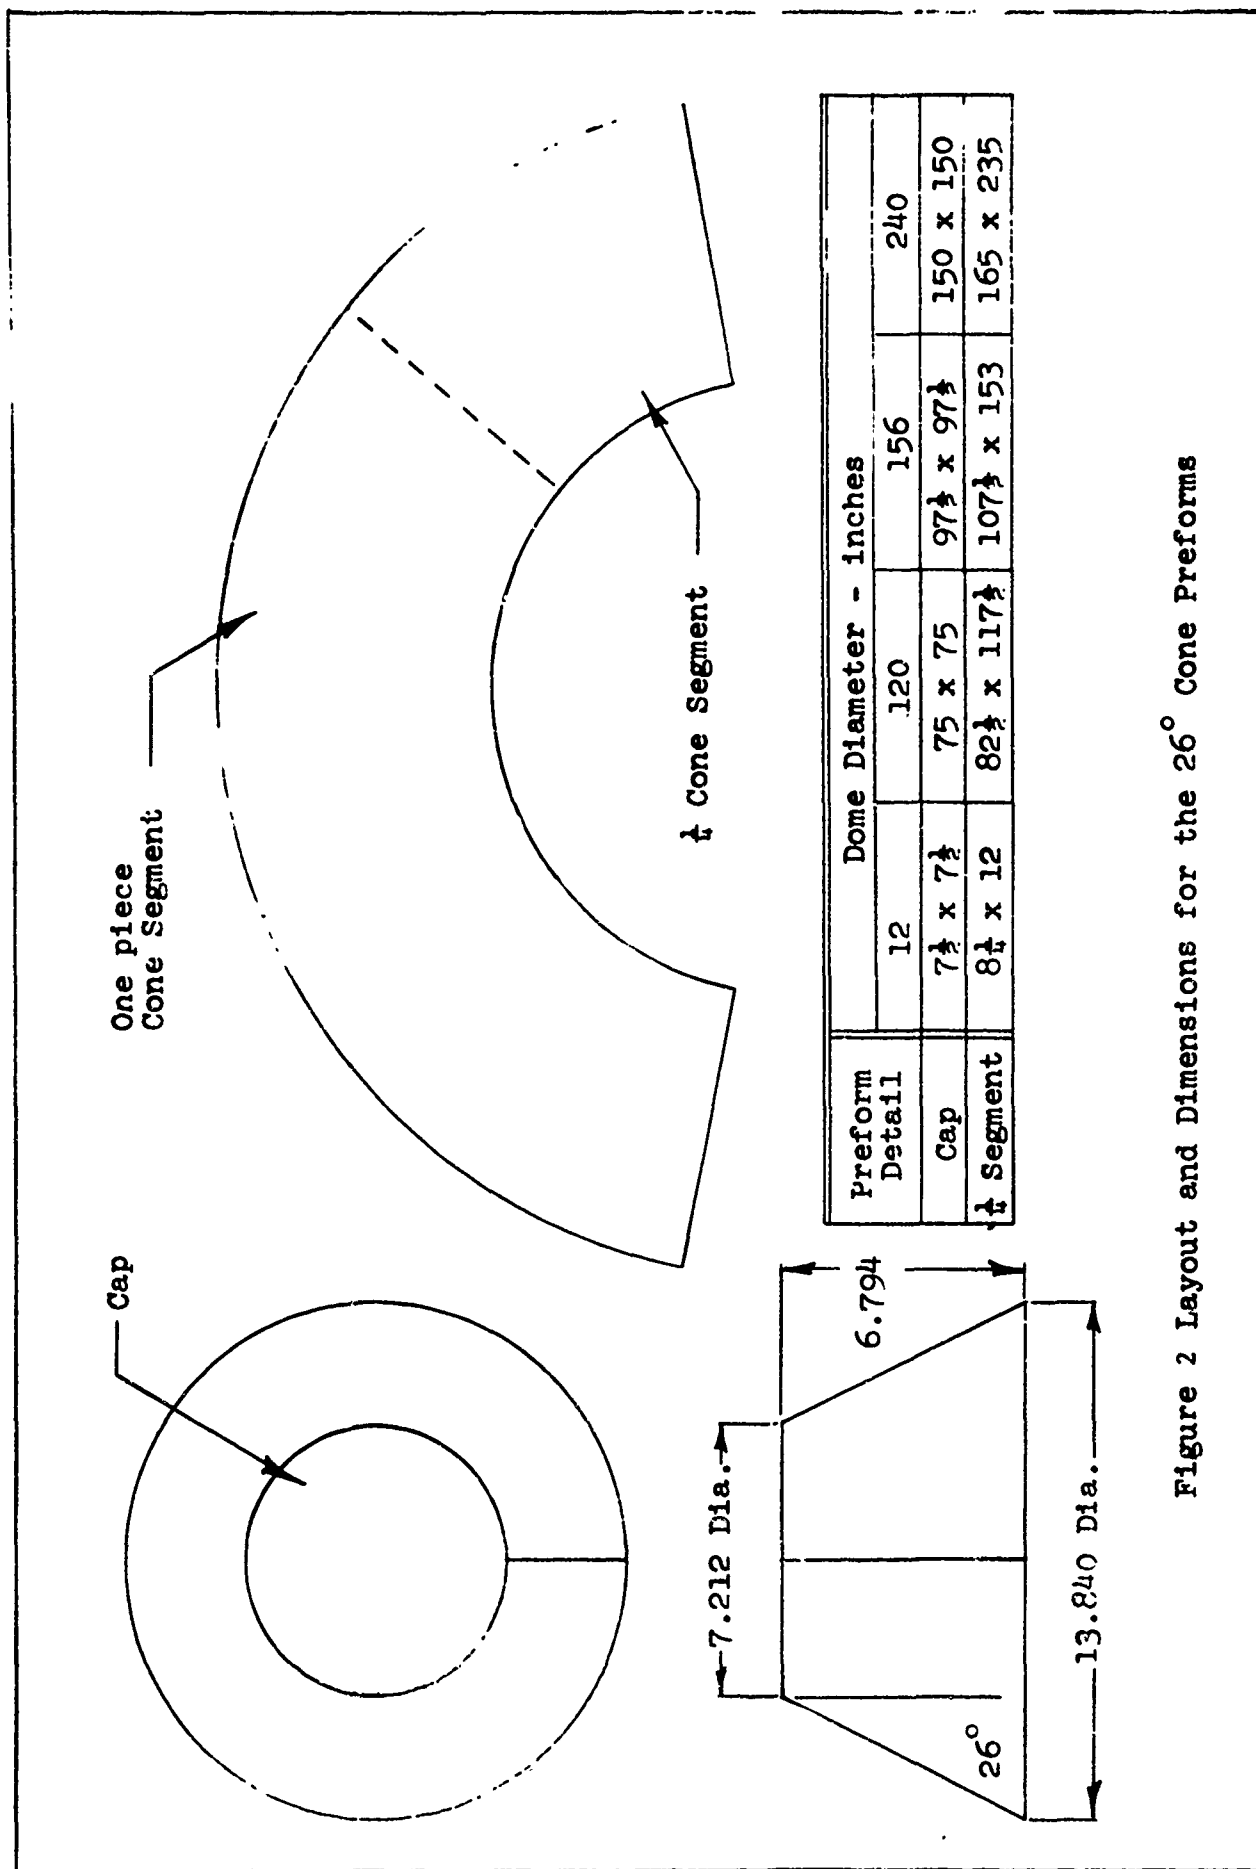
Layout and Dimensions for the 26° Cone Preforms
